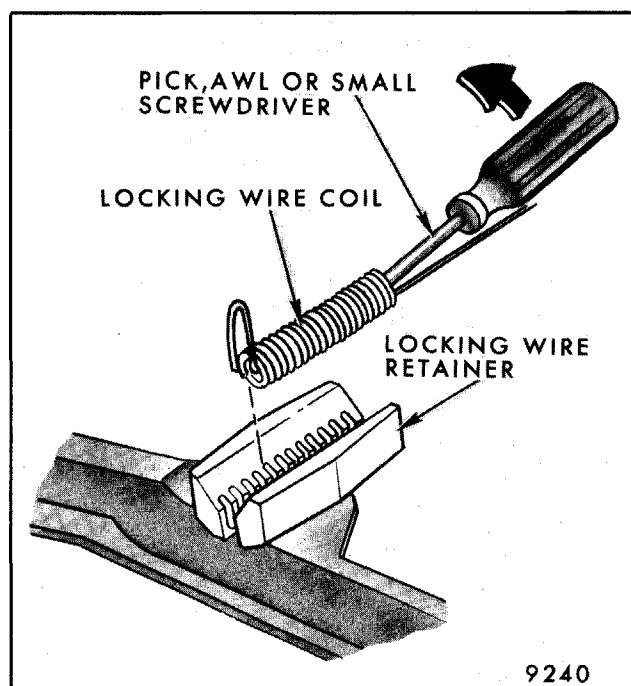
Manually Operated Front Seat Locking Wire Adjustment - "B and C" Styles
